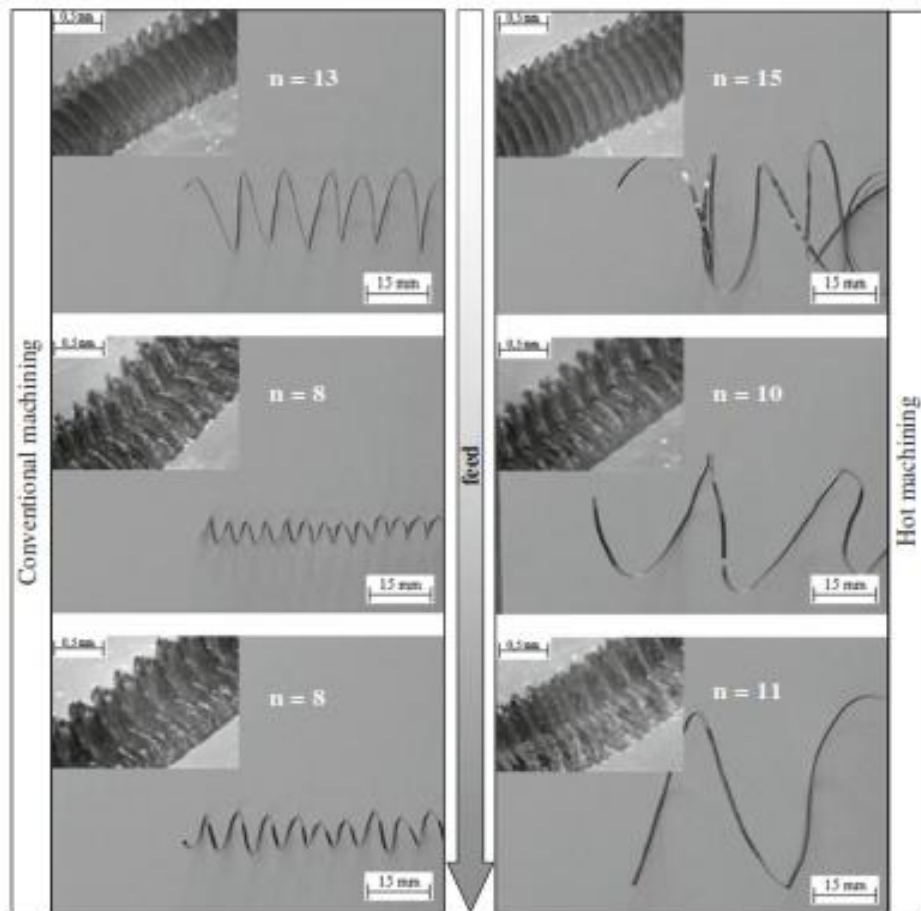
Chips produced in conventional and hot machining under different feeds
